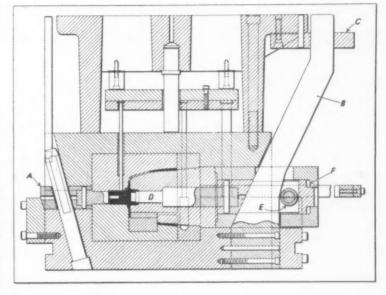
A Horizontal Section of the Die Employed for the Motor Housing Casting
